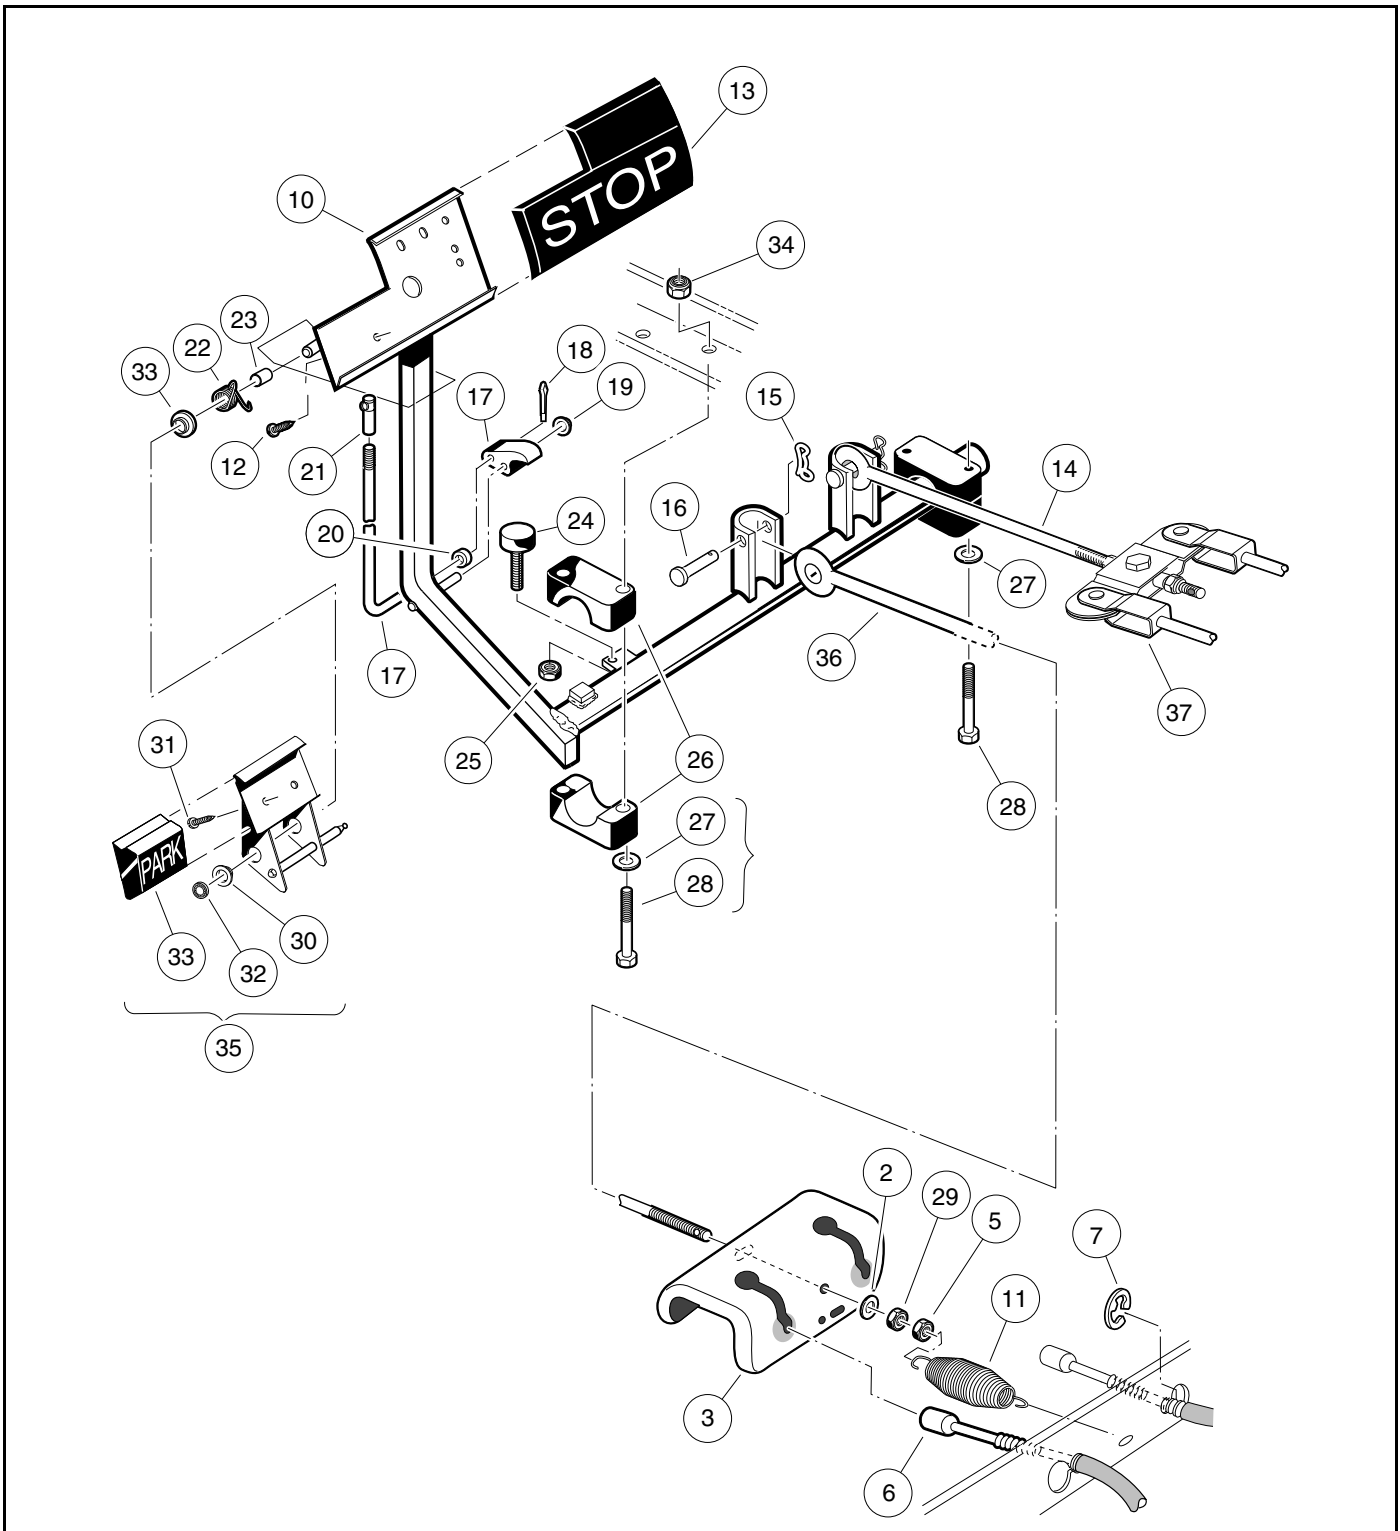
Brake and Park Brake Pedal Assembly and Mounting – Four-Wheel Brake Vehicles
